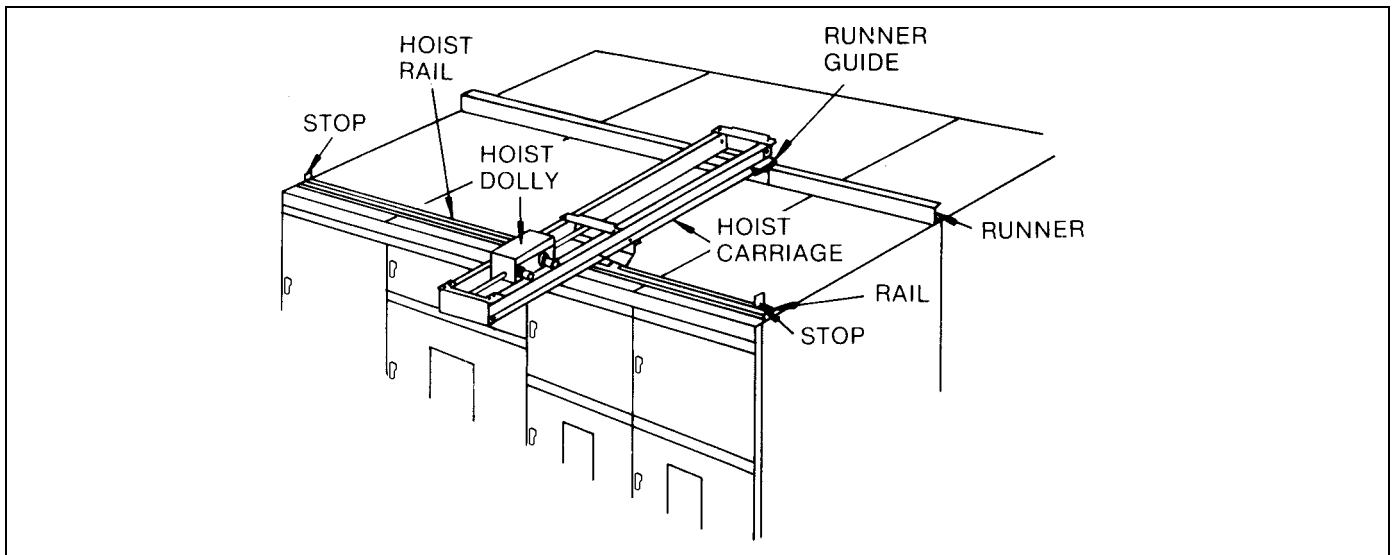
Breaker hoist assembly on indoor switchgear
